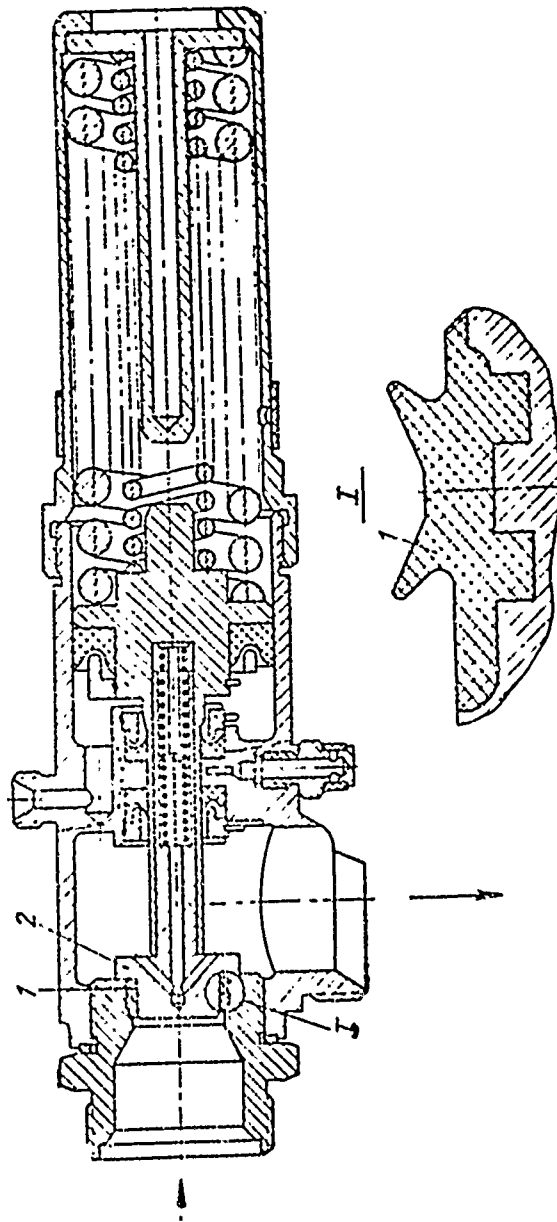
Pneumatic propellant valve with special seal ring
